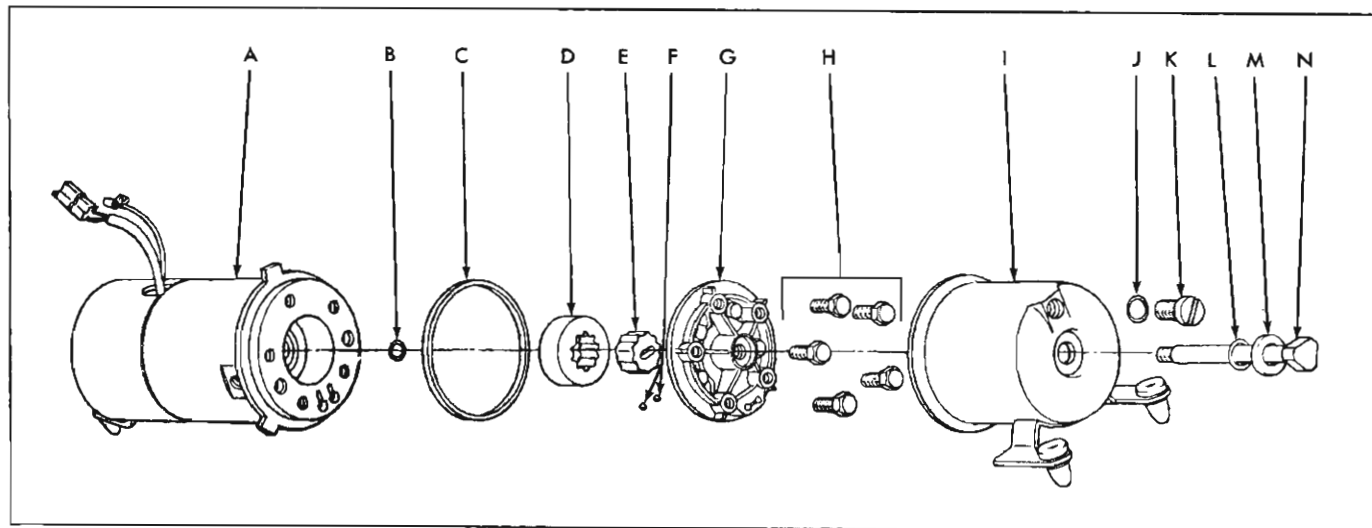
Hydro-Lectric Motor and Pump Disassembled "A", "B" and "C" Styles
